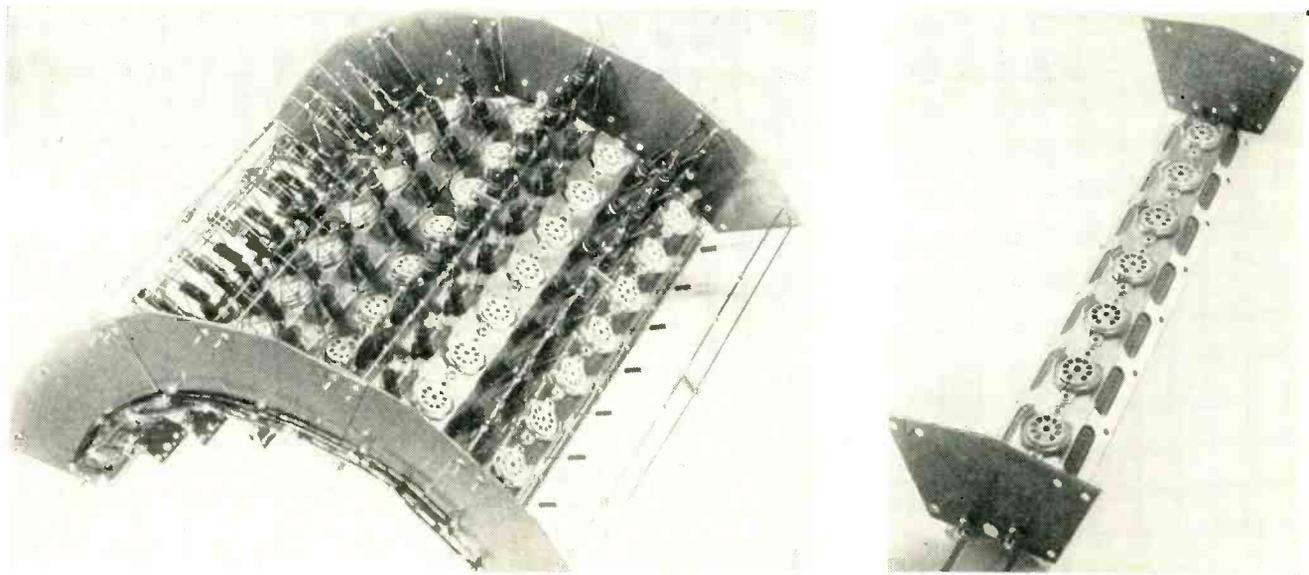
Top view of six-gang chassis using basic chassis shown at right. Closeups of assembly are shown in Fig. 5 and 6
